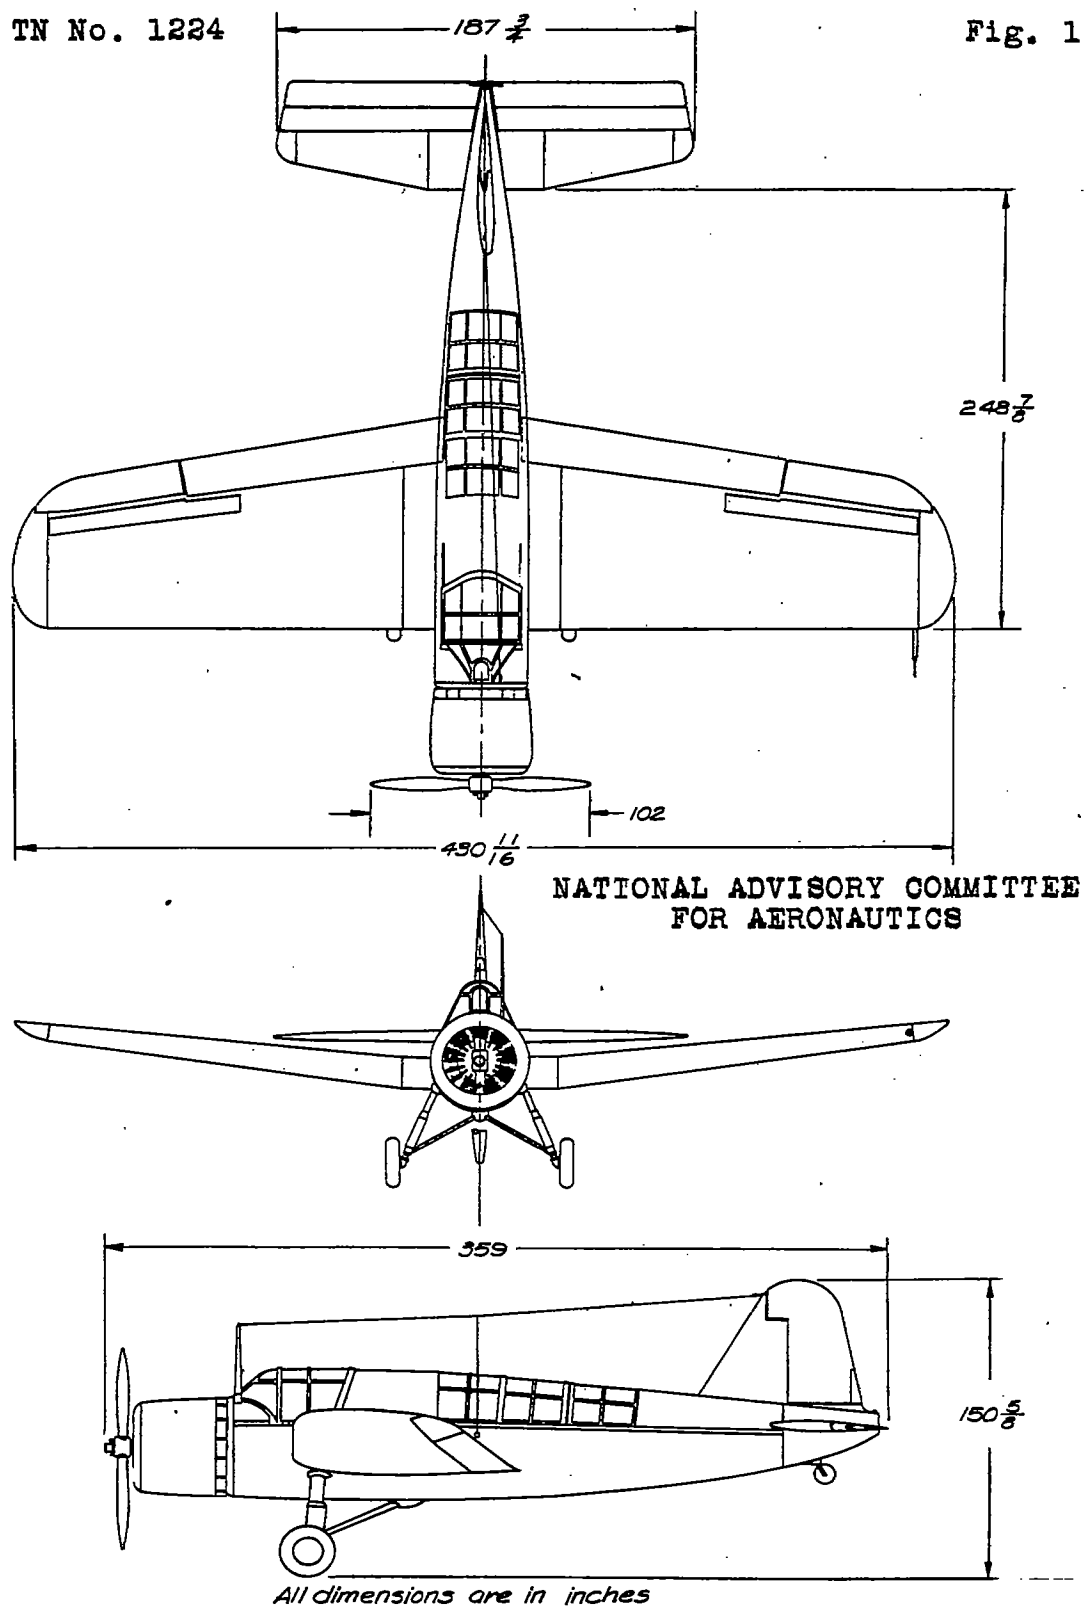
Three-view drawing of the test airplane equipped with a double-hinged horizontal tail.
